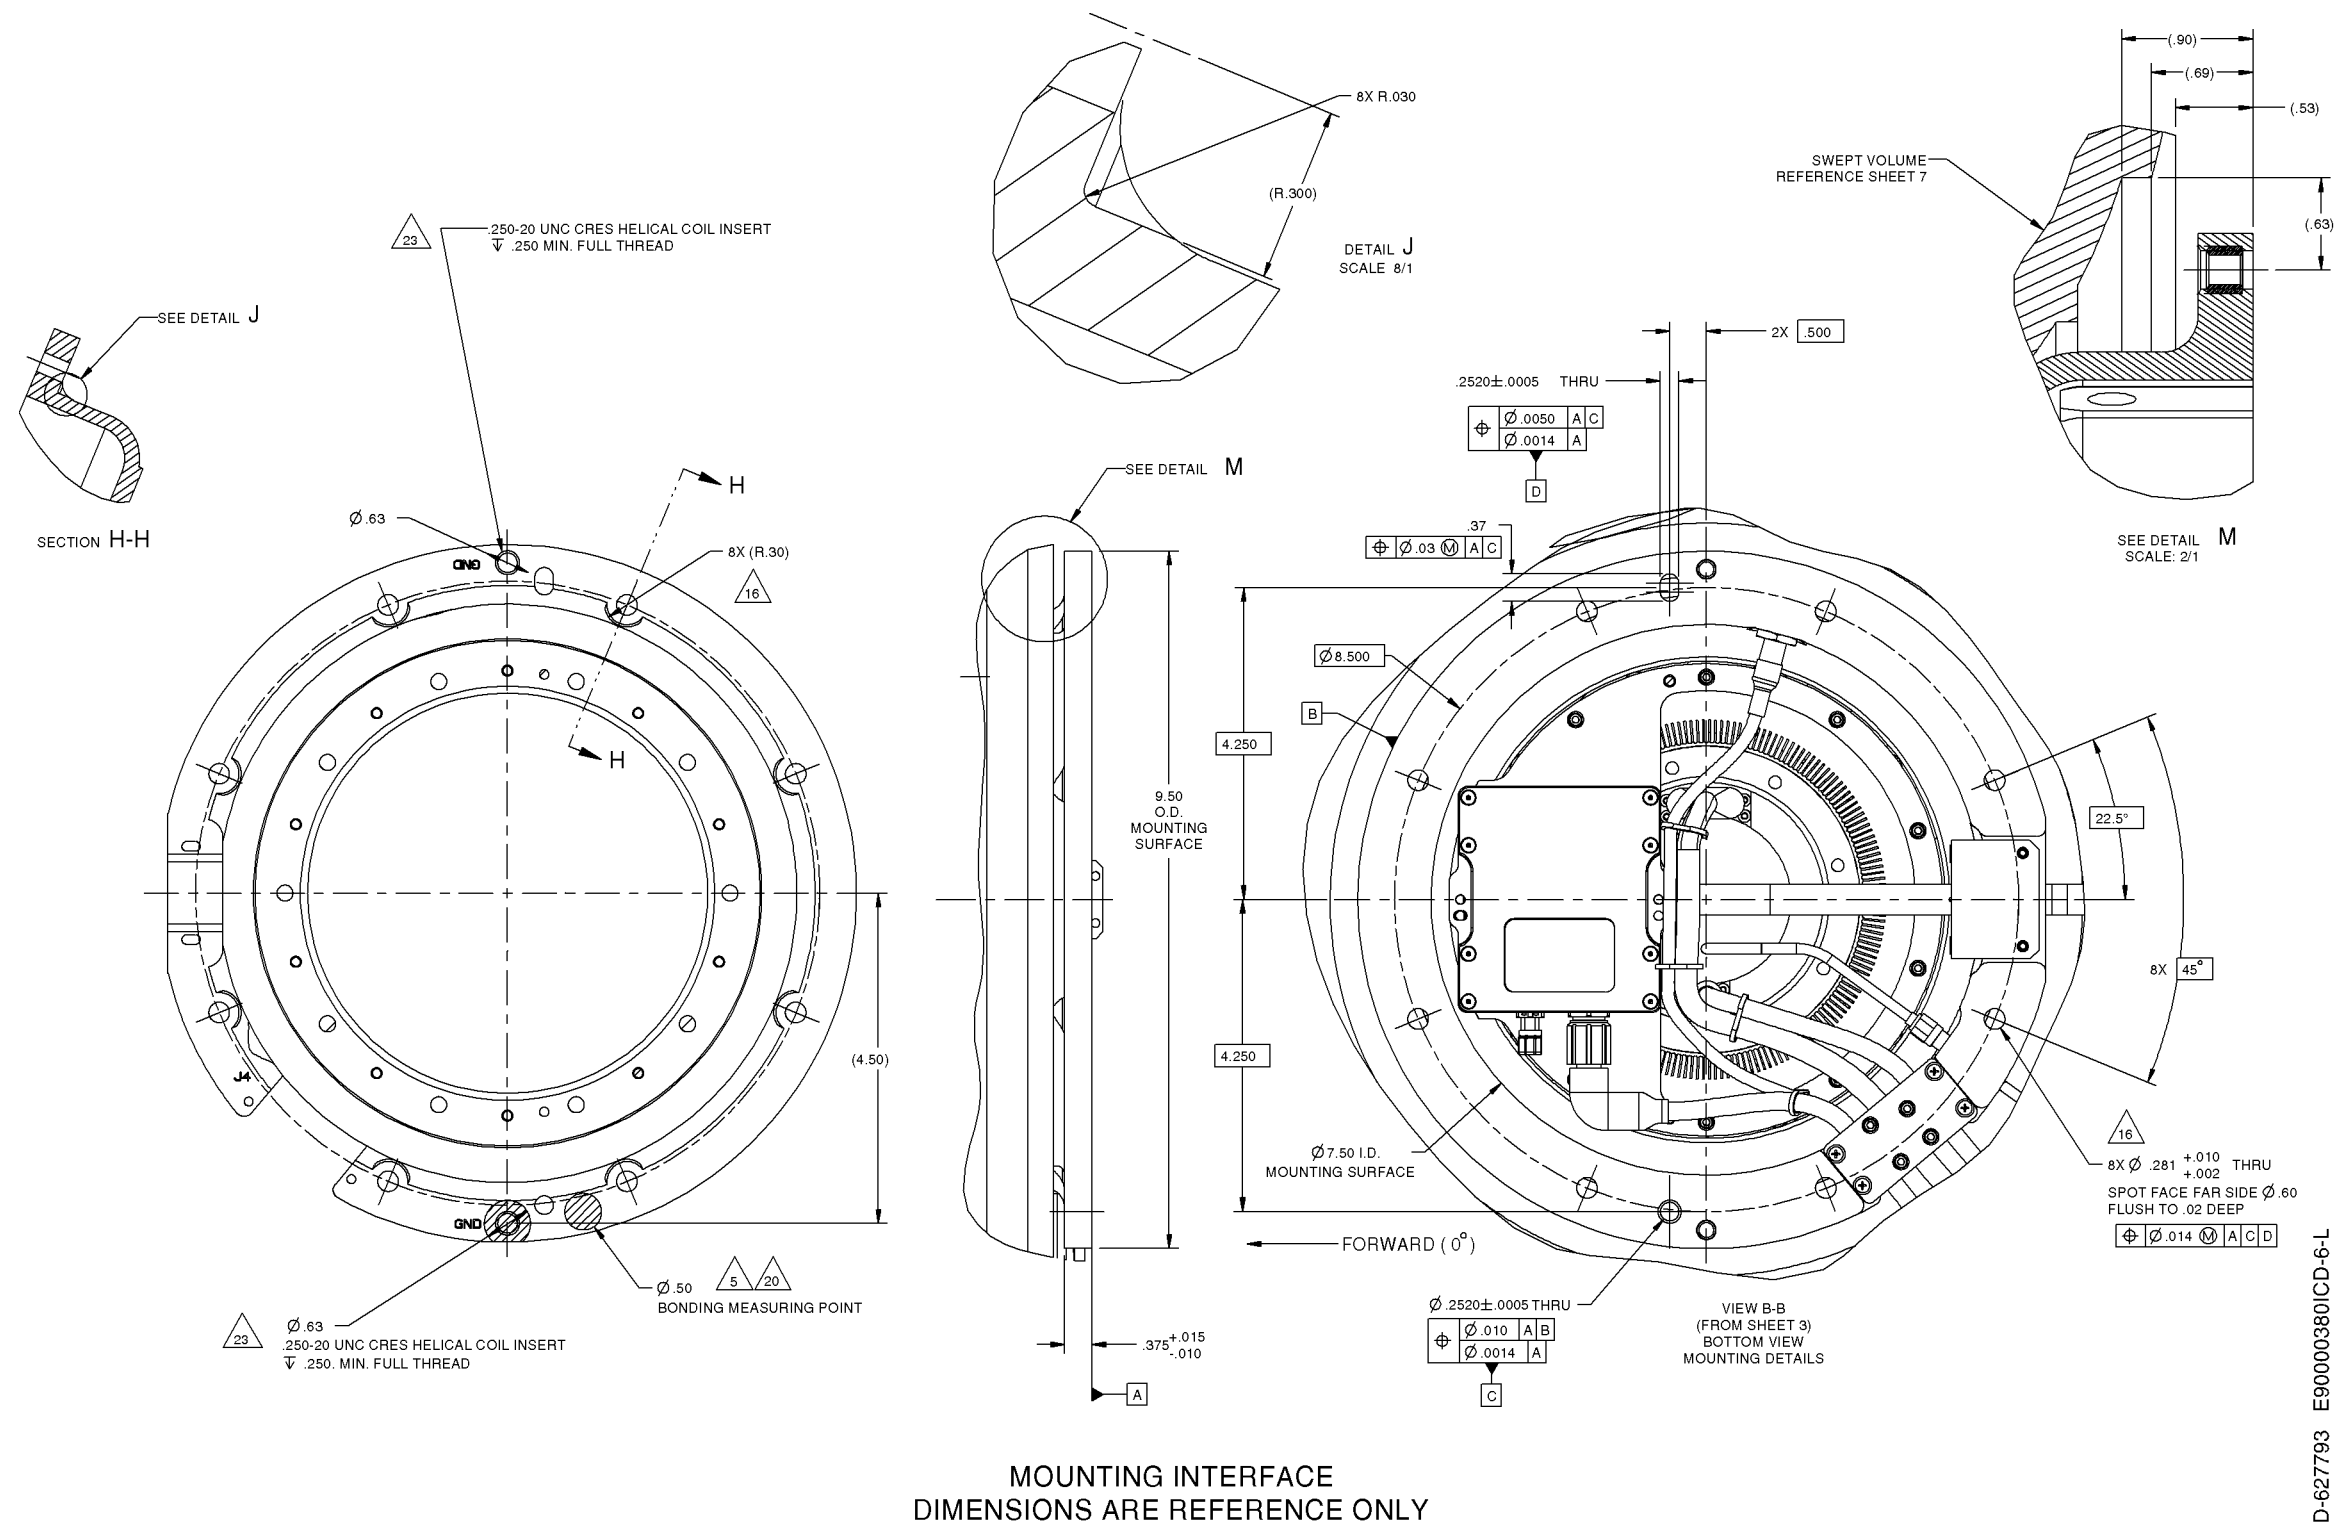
(Sheet 5 of 14) FMA Outline and Installation Drawing (90000380ICD, REV L)
